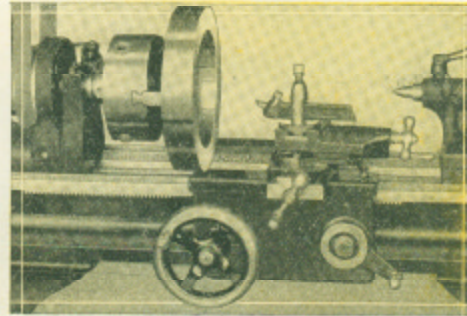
Swinging Work, Over the Lathe Bed, That Measures 9 $\frac{1}{4}$ Inches in Diameter.
